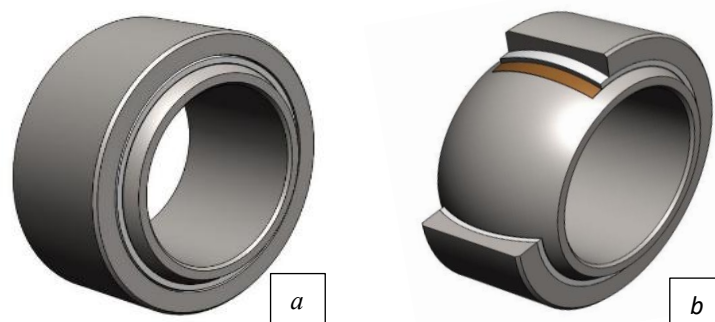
Calculation model of a spherical plain bearing with antifriction composite materials: a – assembled bearing, b – bearing with an intersection of the outer ring and composite materials
